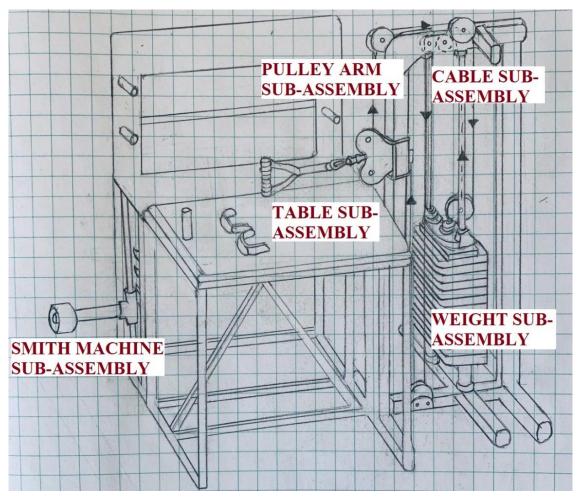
Final hand-sketch of initial design, which will be improved upon with the final CAD.
